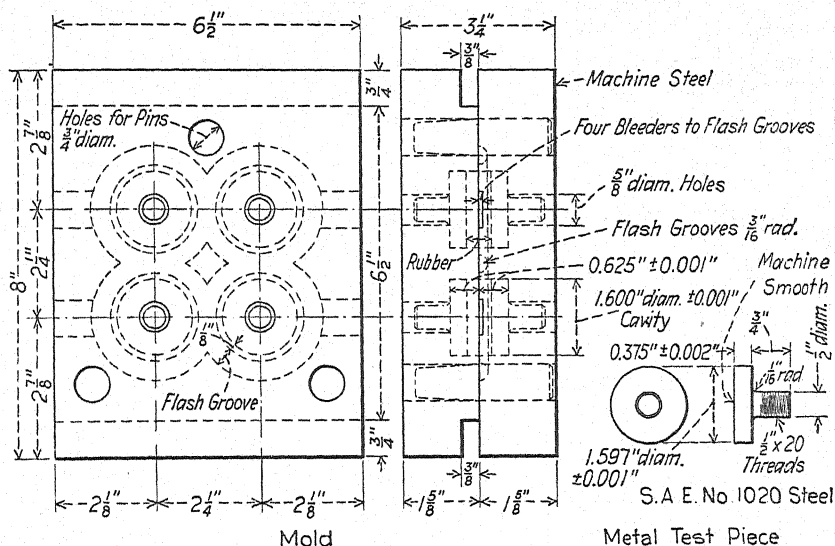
Detailed Drawing of Mold for Adhesion Test Pieces.
